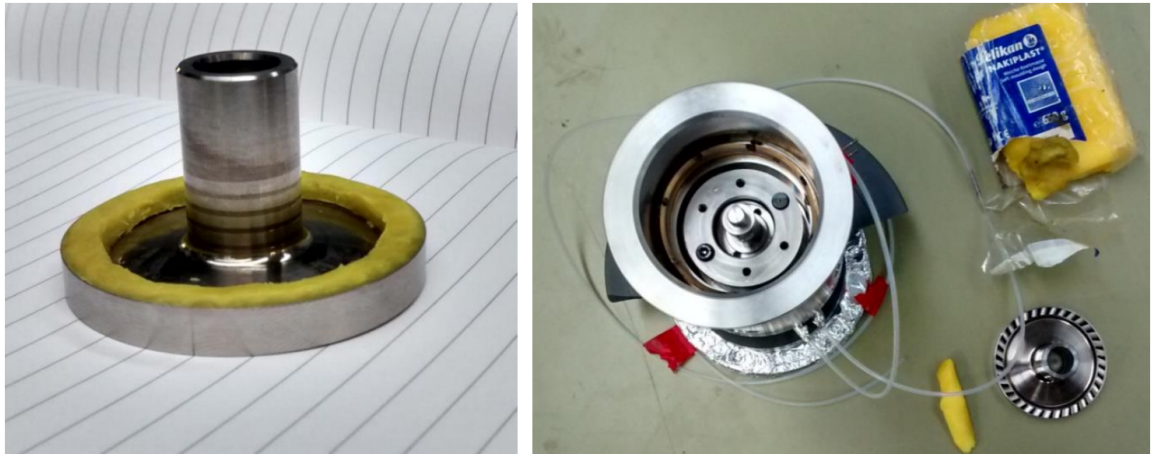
Blocked Rotor on the Left and Mosquito Assembly Without Stator on the Right.
